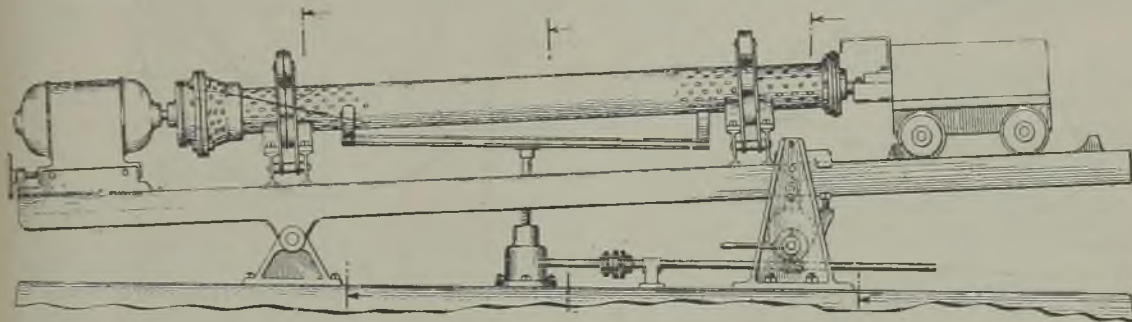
EARLY DESIGN OF CENTRIFUGAL CASTING MACHINE DUE TO W. D. MOORE.
